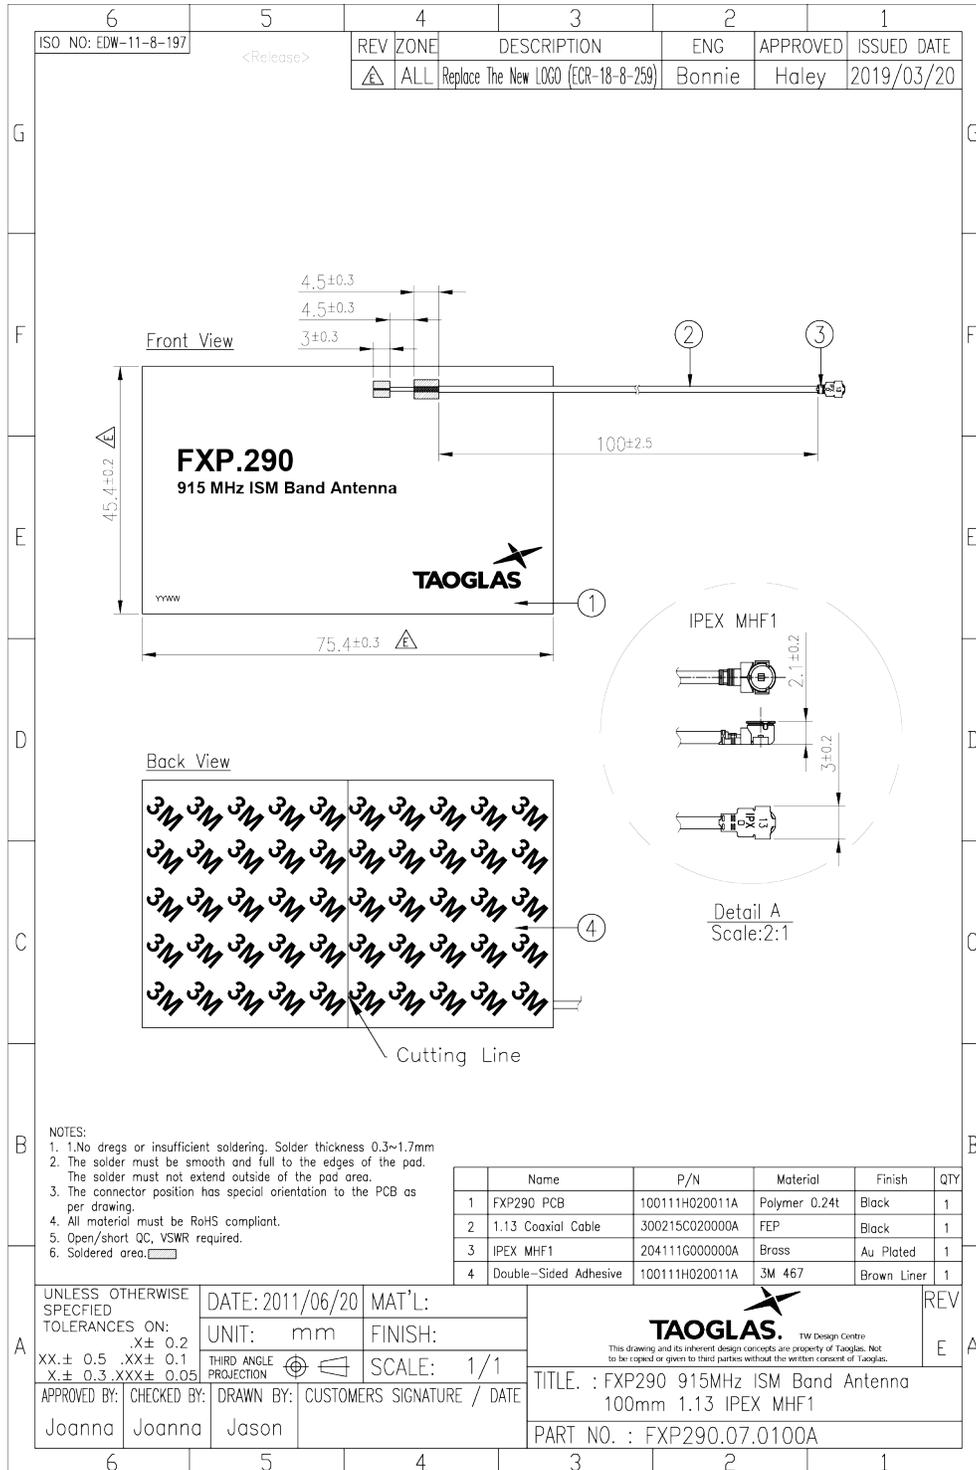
Mechanical Drawing for the FXP290 Antenna.
